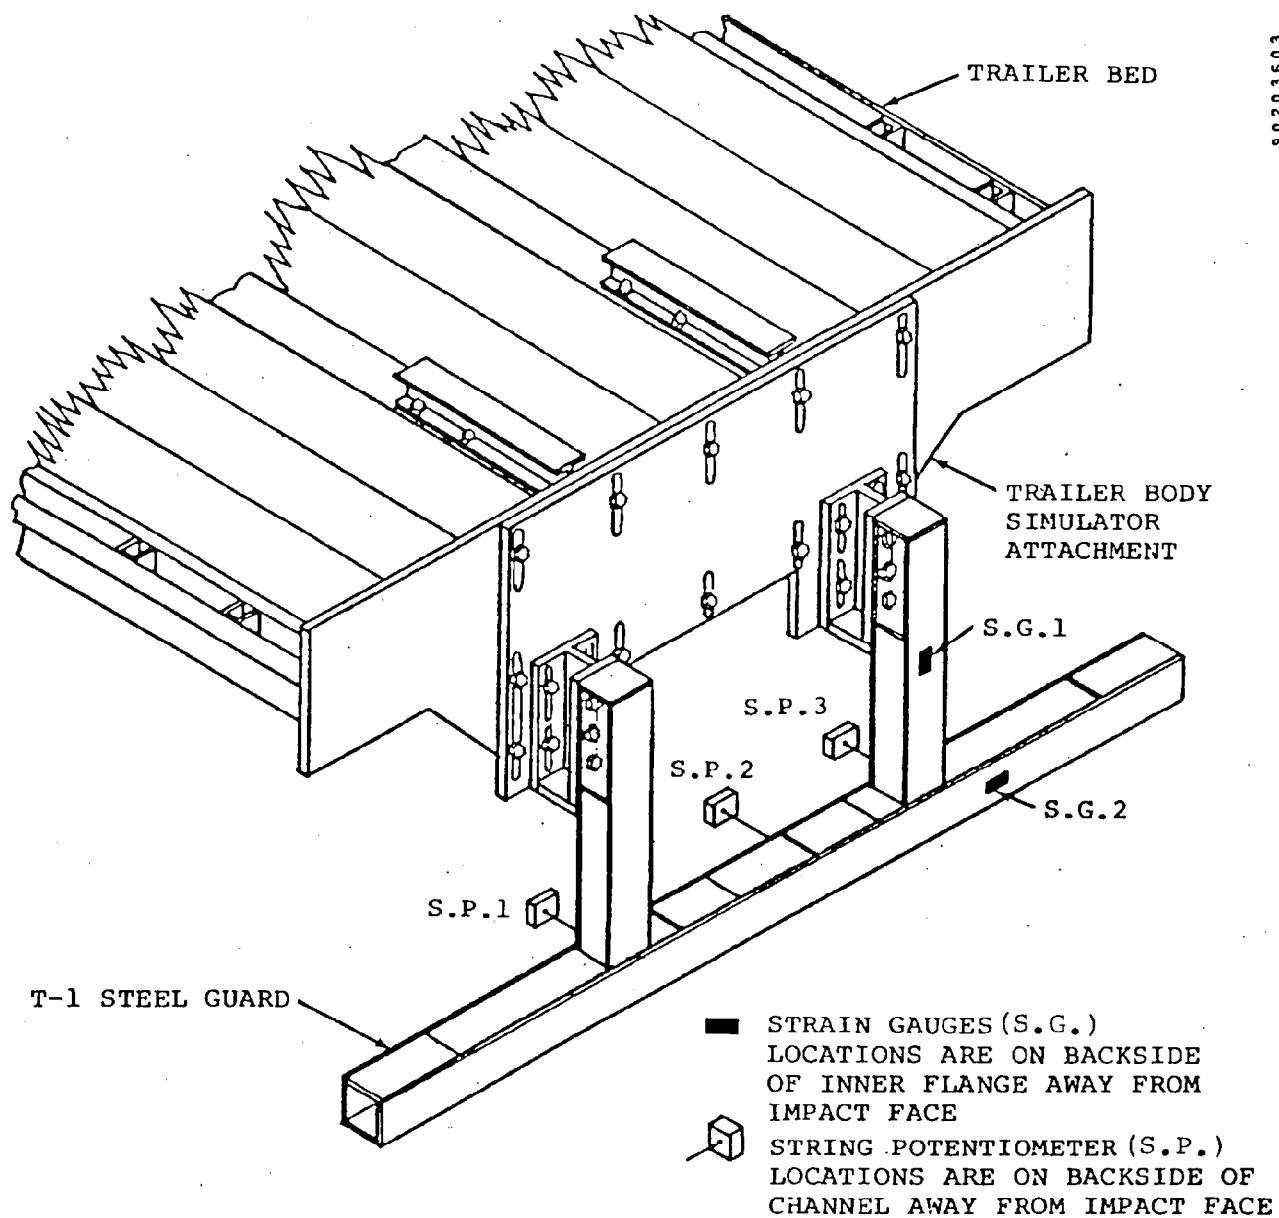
Test No. 5.10 Offset Underride Guard Instrumentation.
